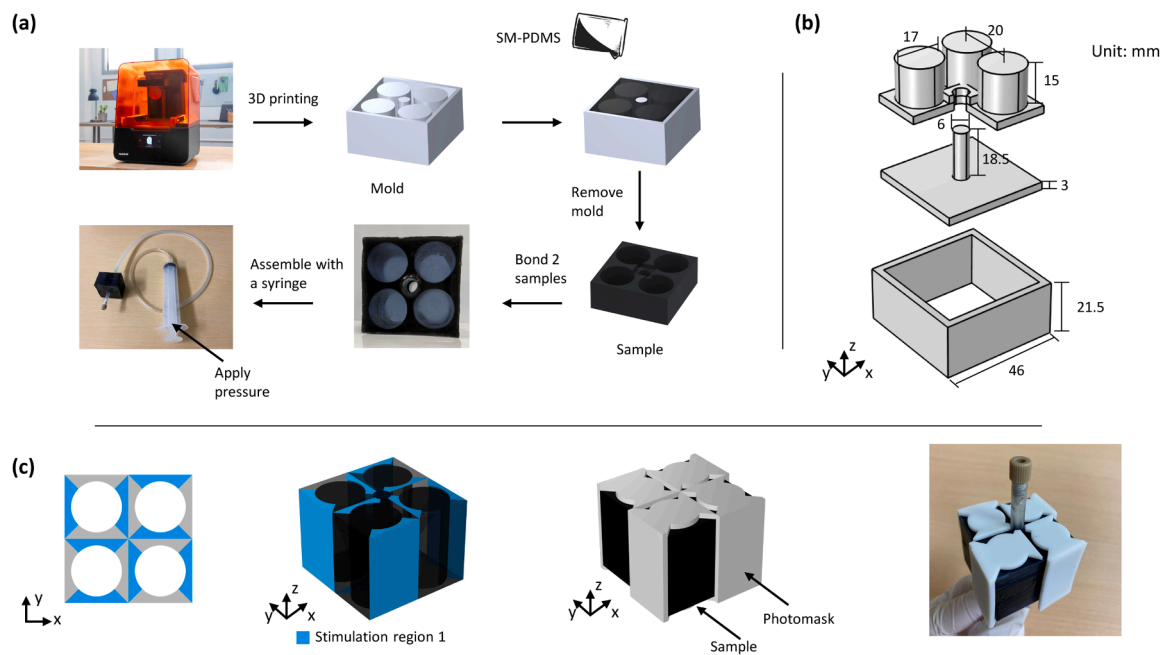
Reprogramming a 2D buckling-induced metamaterial made of SM-PDMS. (a) Process of preparing a 2D buckling-induced metamaterial using 3D printing to make a mold. (b) Sample size of a mold for preparing the buckling-induced metamaterial. (c) Illustration of applying local light stimulation.
